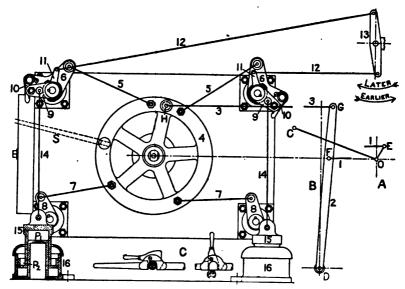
Corliss Valve-gear, Single-eccentric Type, with Full Wrist-plate.
